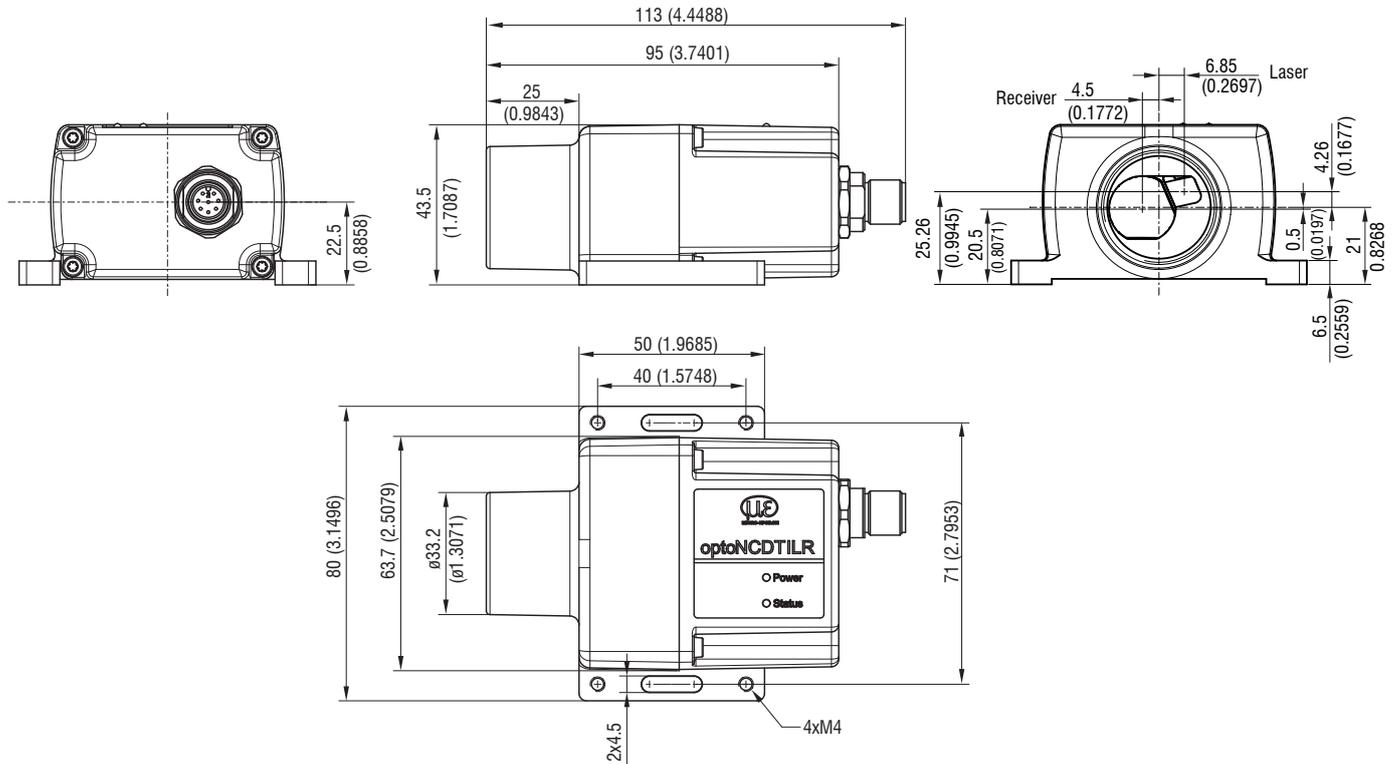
Dimensional drawing optoNCDT ILR3800-100, dimensions in mm (inches, rounded off)
